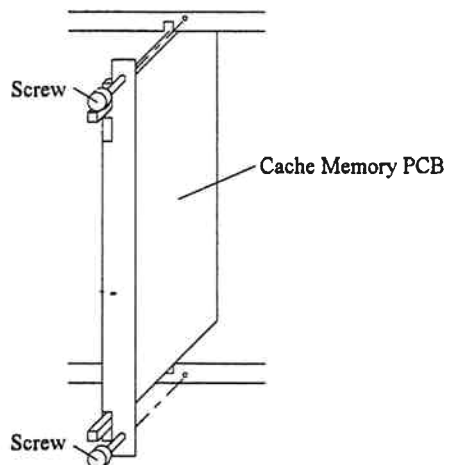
Removal of the Cache Memory PCB
